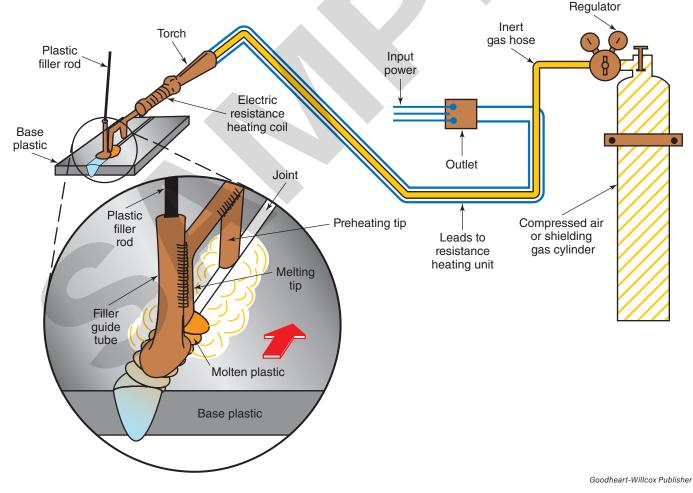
Torch plastic welding. The heat source is heated air or a heated inert gas. The stream of heated gas first preheats the joint, then heated gas from a second orifice further heats the base material as a plastic filler rod is fed through a tube to the joint.
